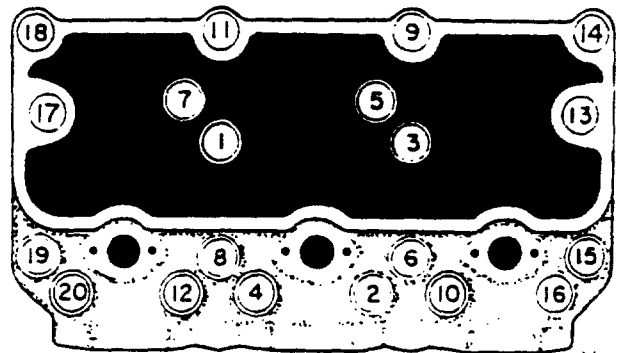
Cylinder Head Stud Nut Tightening Sequence
